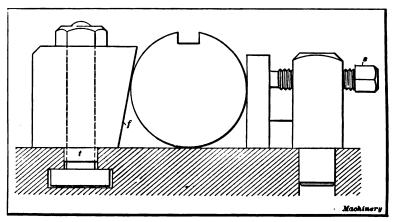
Method of Holding Shaft for Splining or Keyseating
